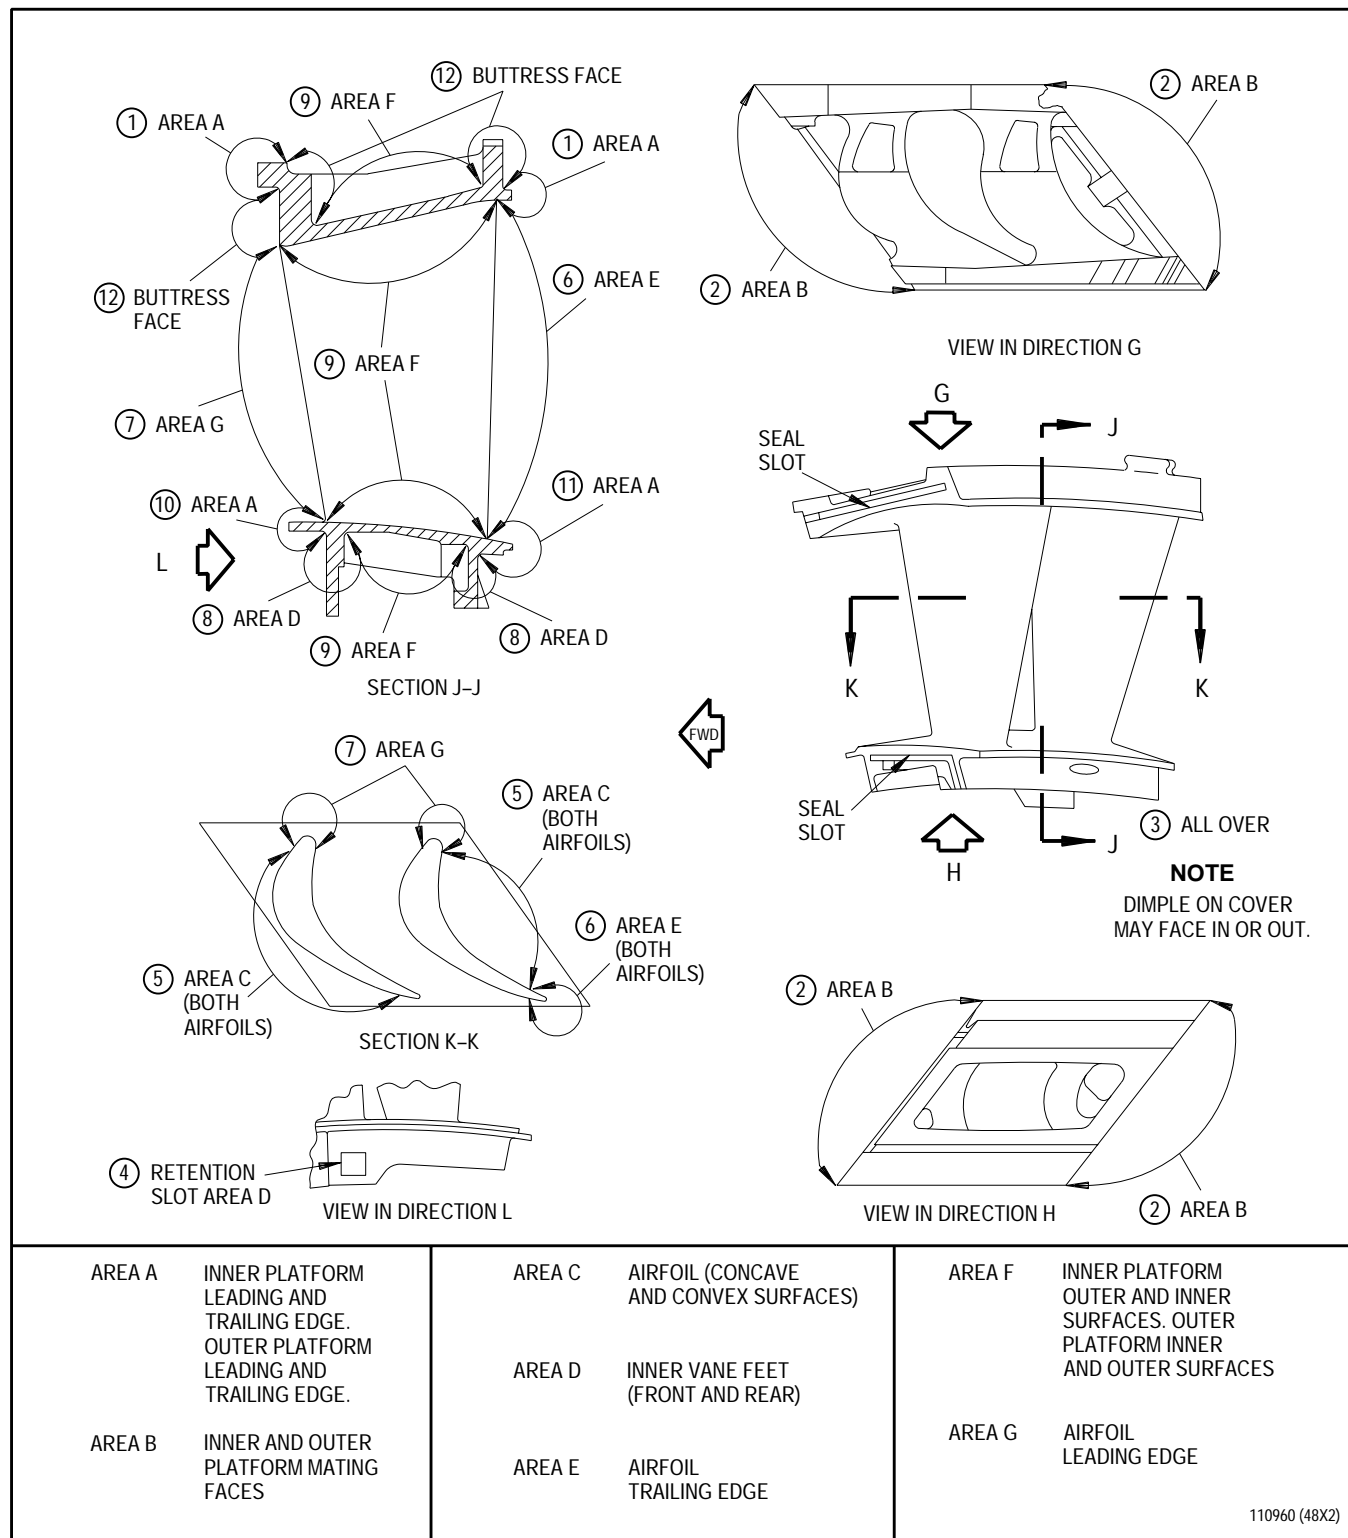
Second Stage Turbine Stator Vanes - Inspection
